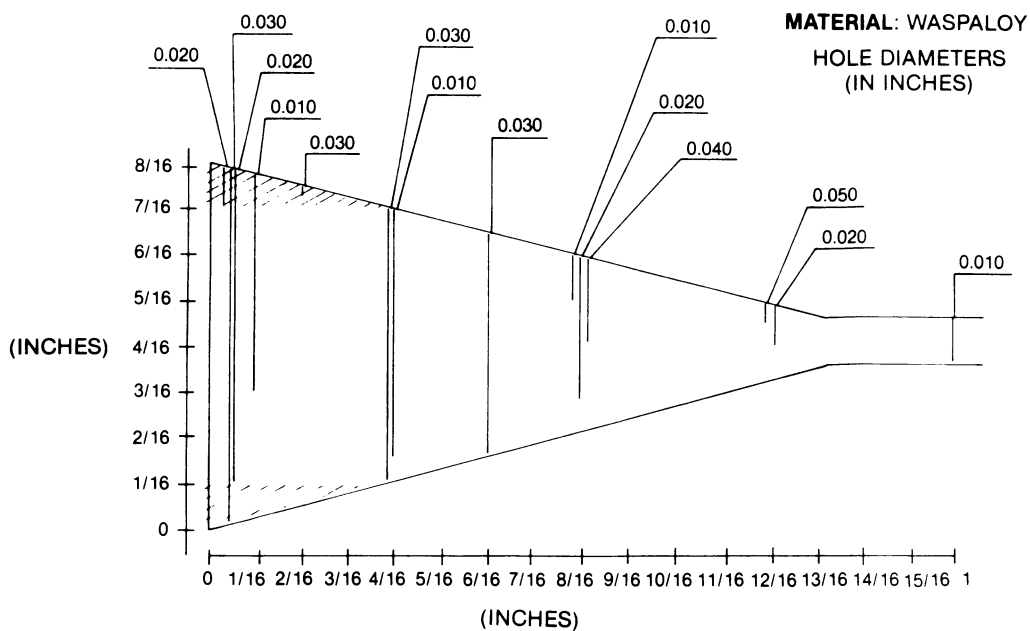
Side-drilled holes in the 8 HPC disk bore
